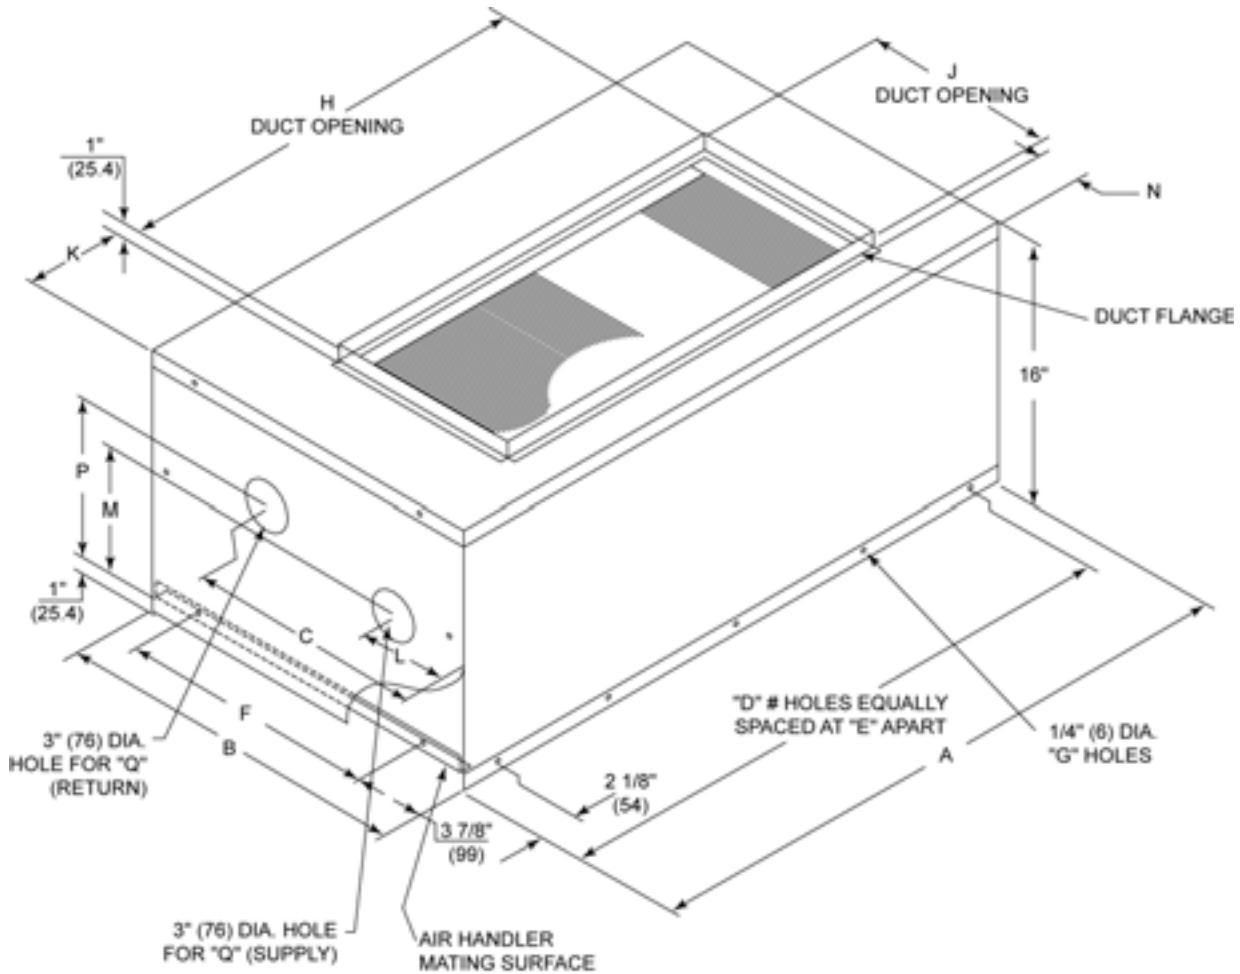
Hot Water Coil Accessory. All dimensions are in inches (millimeters).
